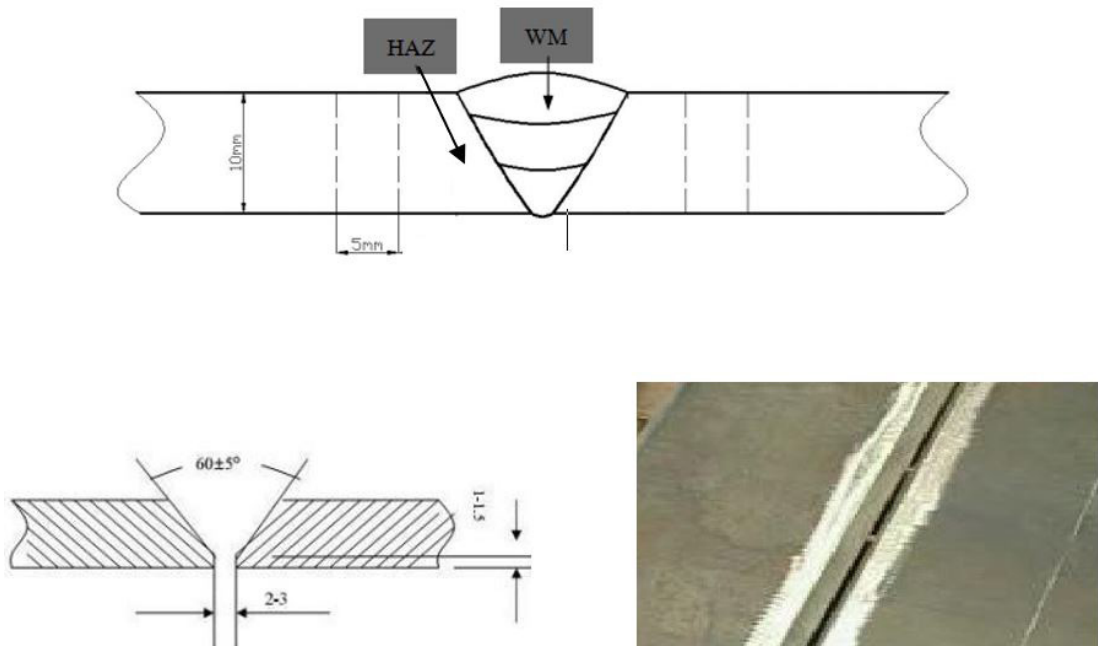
Schematic diagram of the welded joint, welded plate and macrograph.
